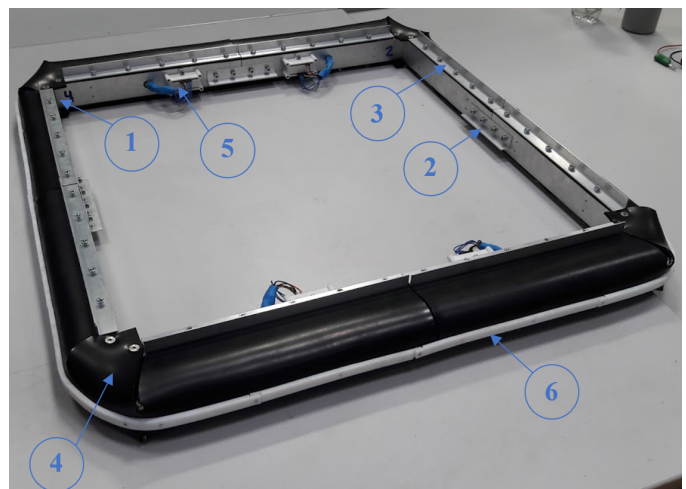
Prototype of bumper system for ropod platform. build from four bended corner parts (1). connected with connection strip (2). The rubber is clamped by aluminium profile(3). Corners are made by cutting and folding the rubber (4). Arduino is placed on the inside of the bumper (5). A nylon strip is placed around the bumper (6).
